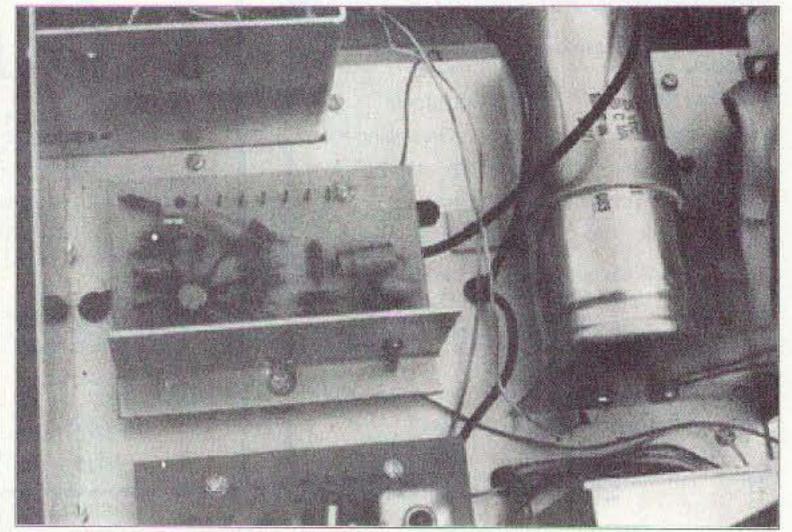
Photo B. The low level RF driver is mounted to a small heat sink. This board plugs into a chassis-mounted socket.
